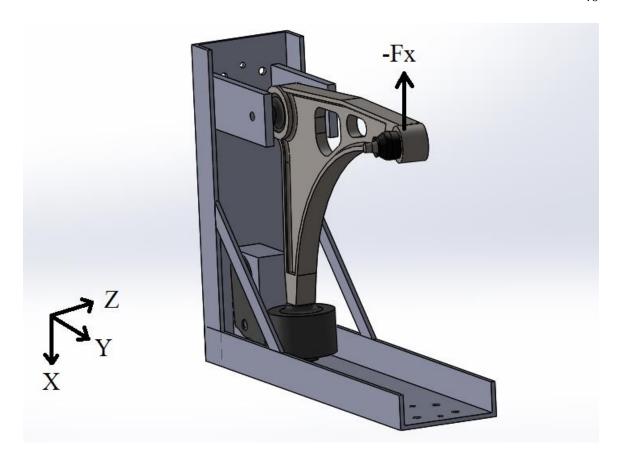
Assembly for Fx (longitudinal) loading
